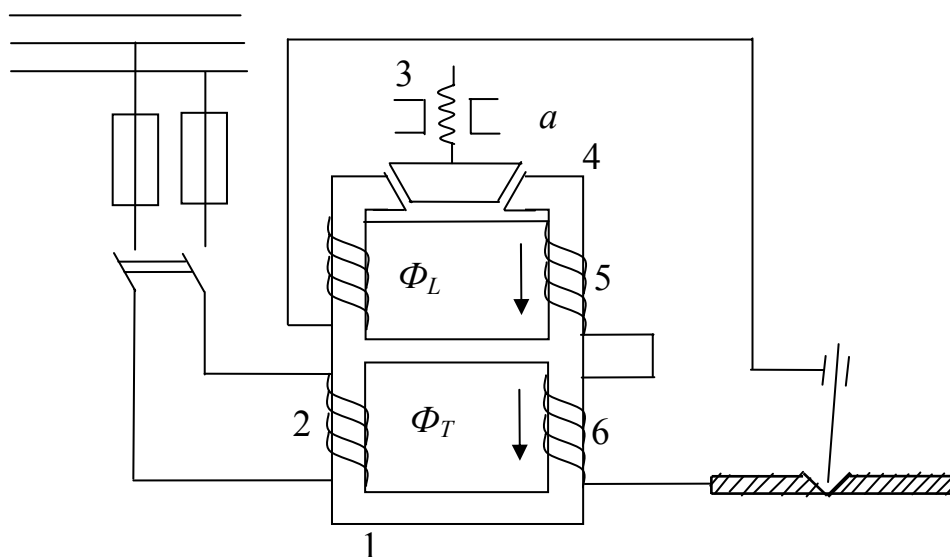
Scheme of the welding transformer with built-in choke:
